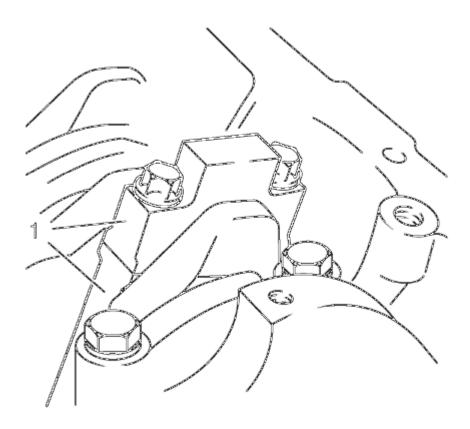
Connecting Rod Bearing Cap Courtesy of GENERAL MOTORS COMPANY
